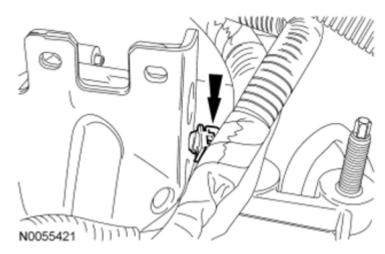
Locating Upper And Lower Radiator Hose Courtesy of FORD MOTOR CO.
